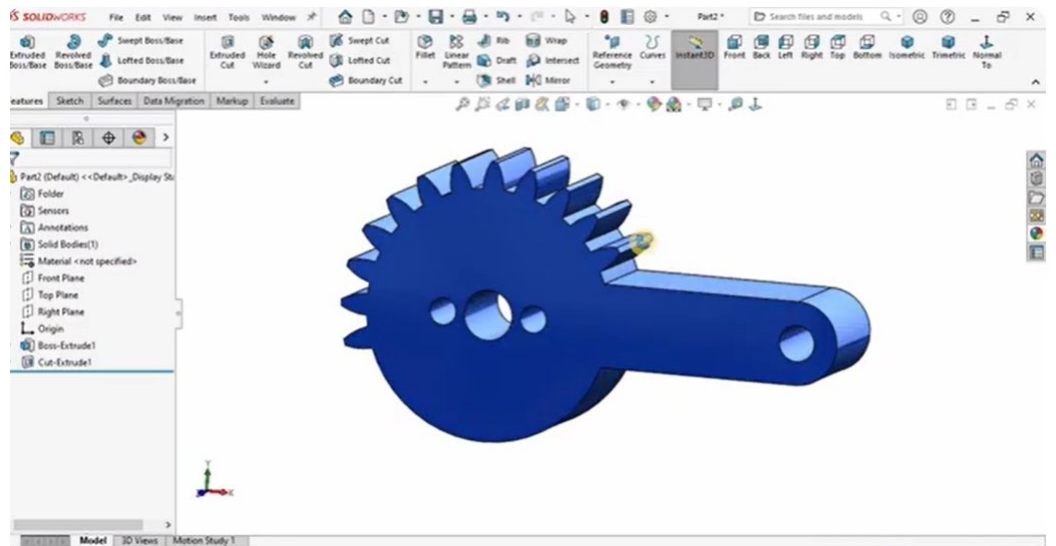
Part 7 — Gear with Arm Link | SolidWorks 2022
